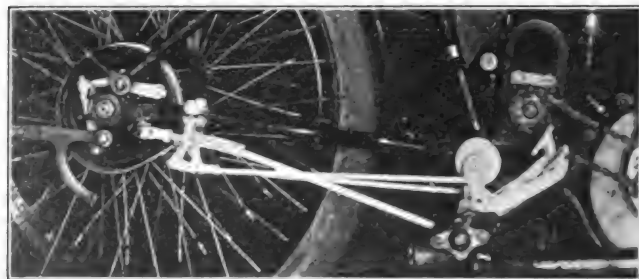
Side view of foot lever and rods. The combination lever is raised and retains its position through the action of the high gear rod spring. Fig. 2 shows a rear view of the parts when foot levers are in this position.
